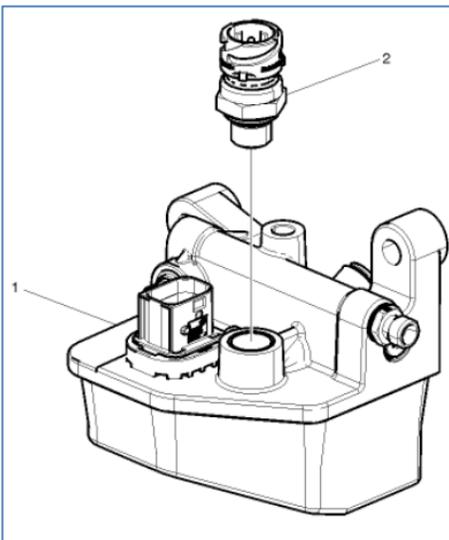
US10+6 AND NEWER - AHI MODULE WITH FUEL PRESSURE SENSOR
